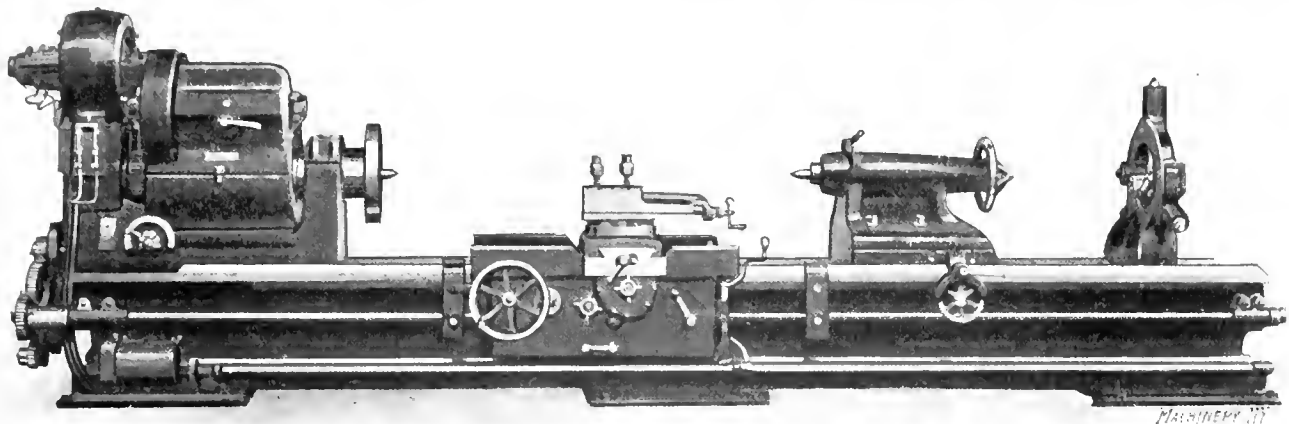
Heavy Motor-driven Lathe built by the Springfield Machine Tool Co.
